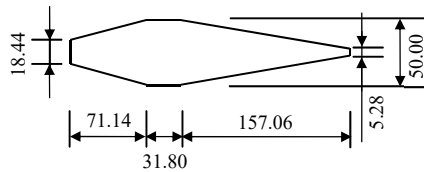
Dimensions of spindle-shaped striker (unit: mm)
